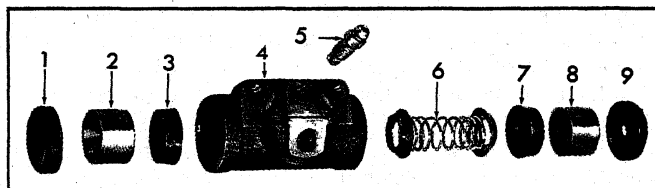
Chevelle Wheel Cylinder—Exploded View
